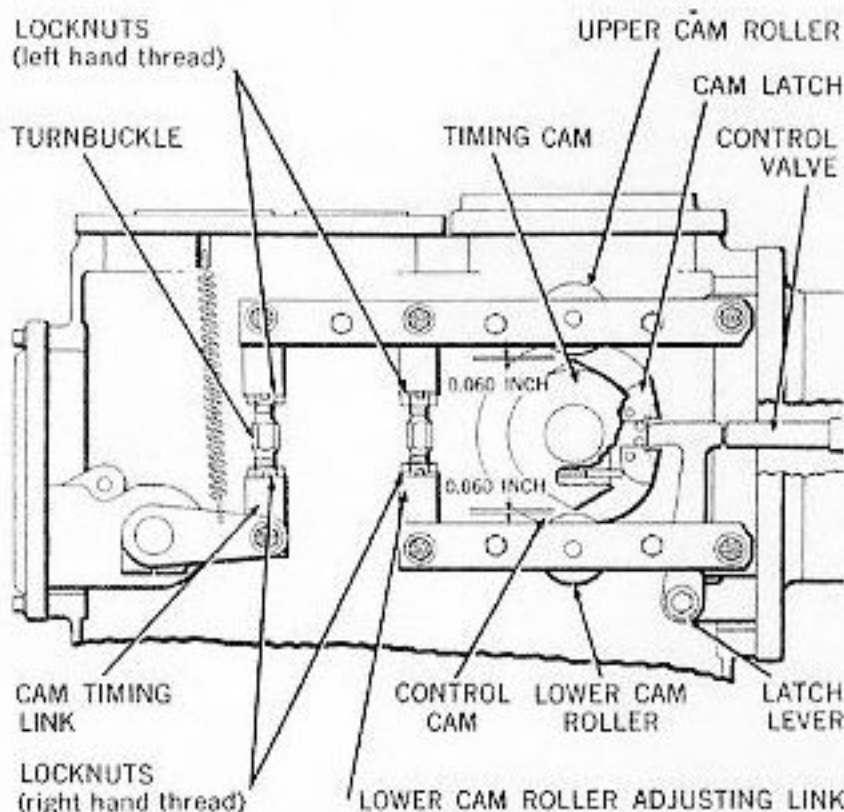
Cam Timing Link and Cam Roller Link Adjustment
